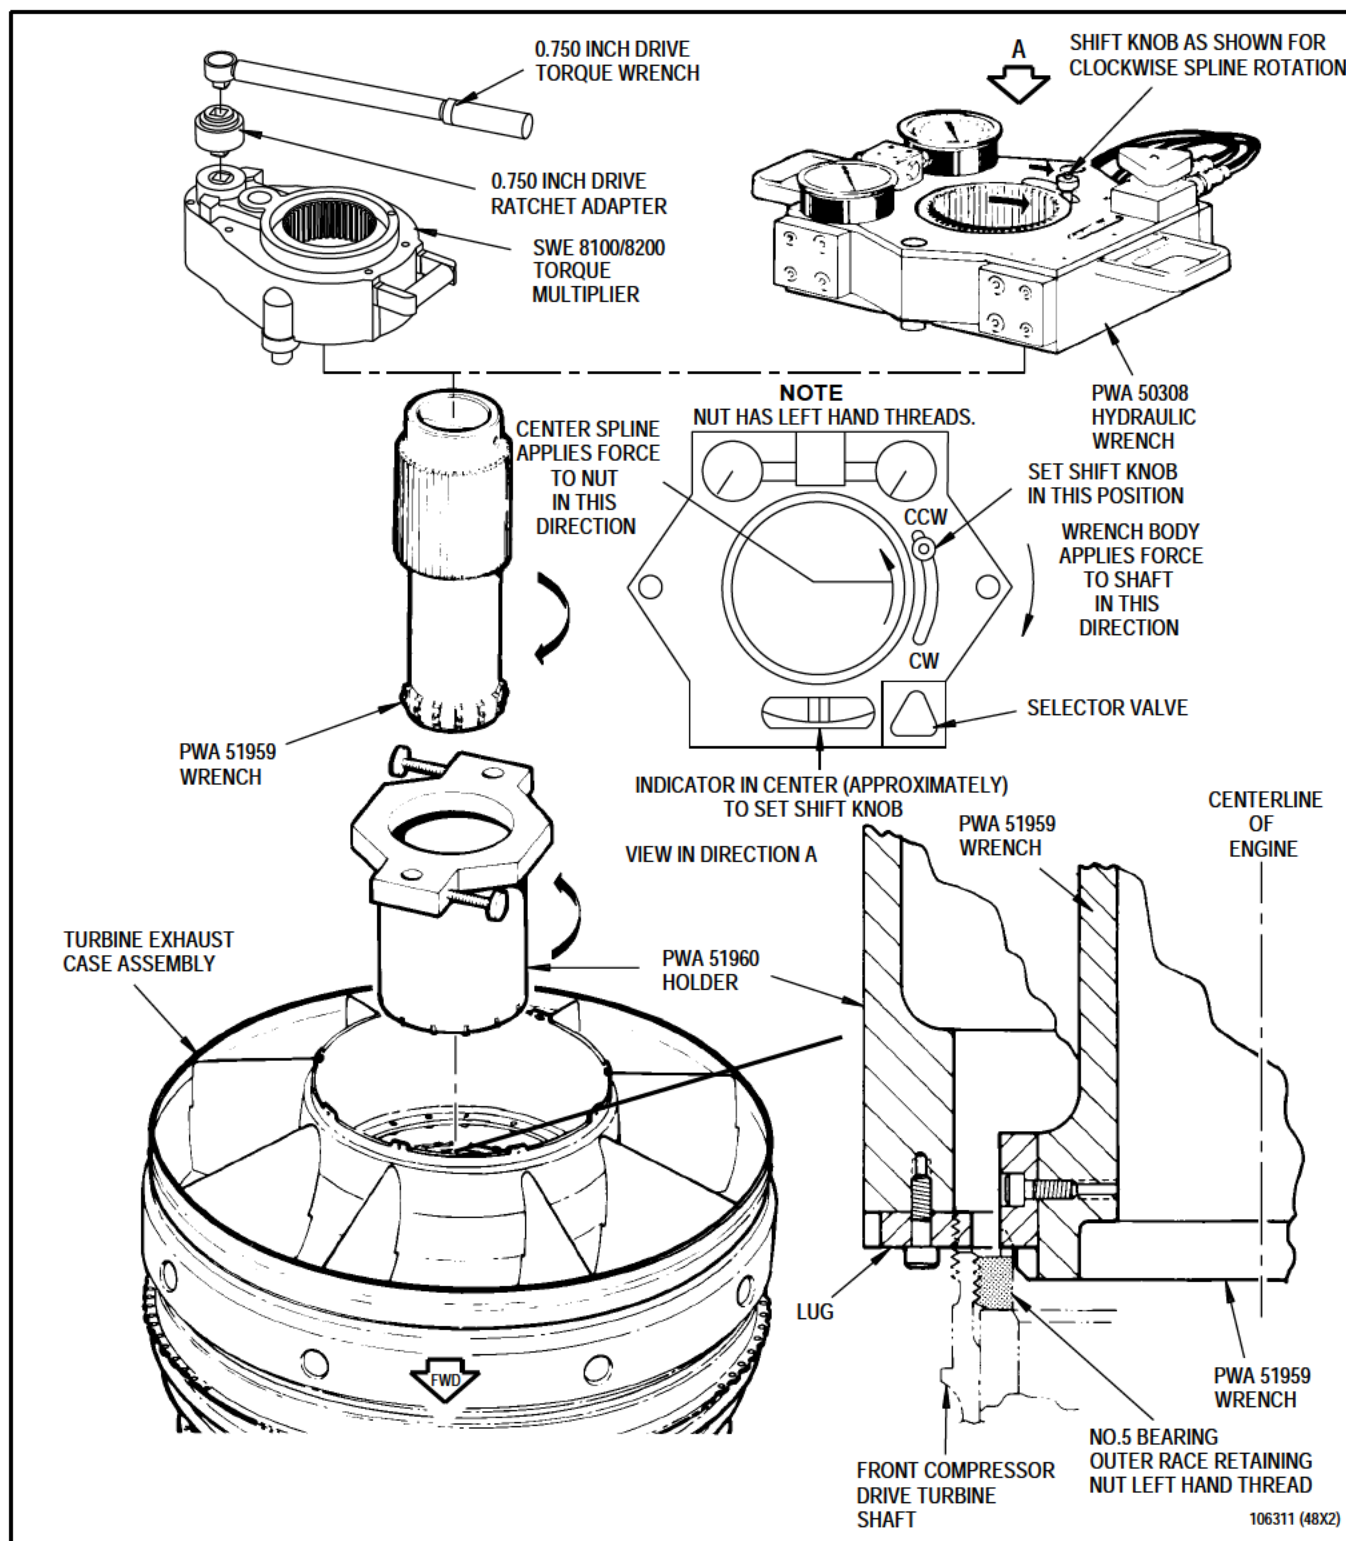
No. 5 Bearing Outer Race and Outer Race Retaining Nut - Installation (Sheet 4 of 4)
